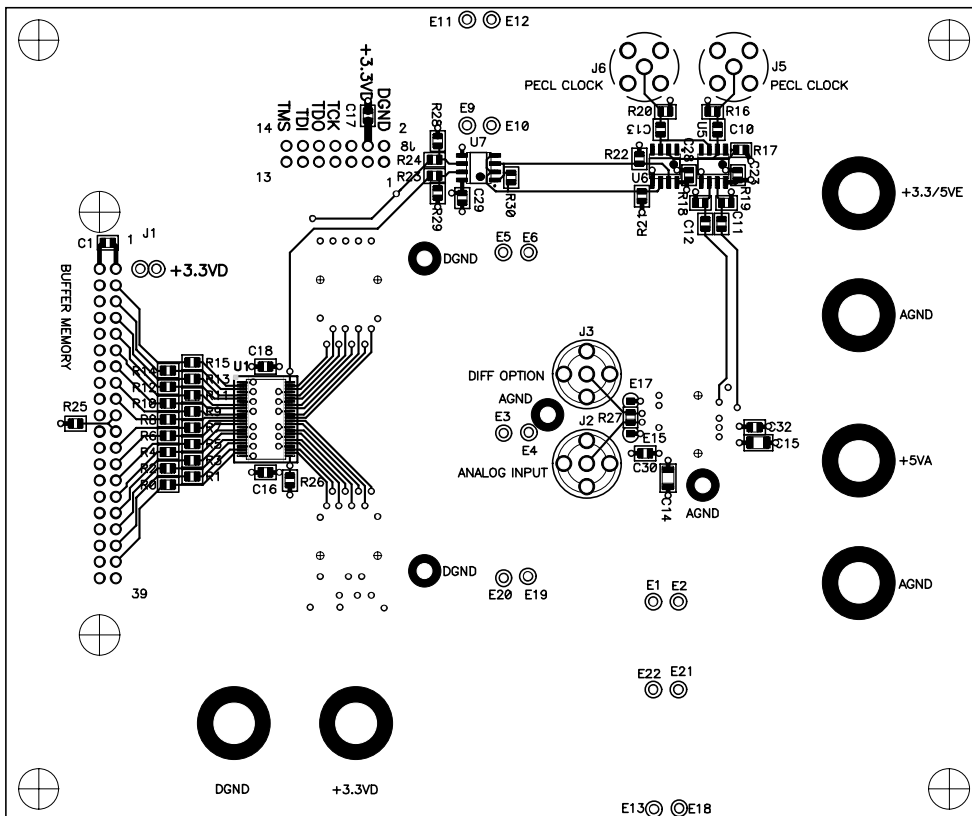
Evaluation Board Mechanical Layout, Bottom View
